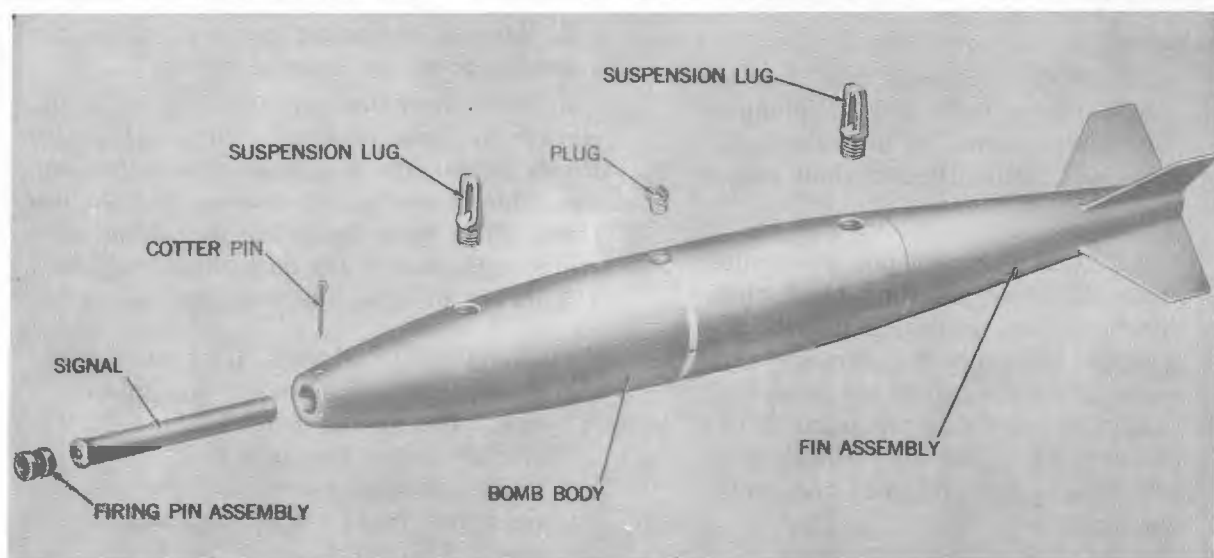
56-lb Practice Bomb Mk 89 Mod 0, Exploded View.
